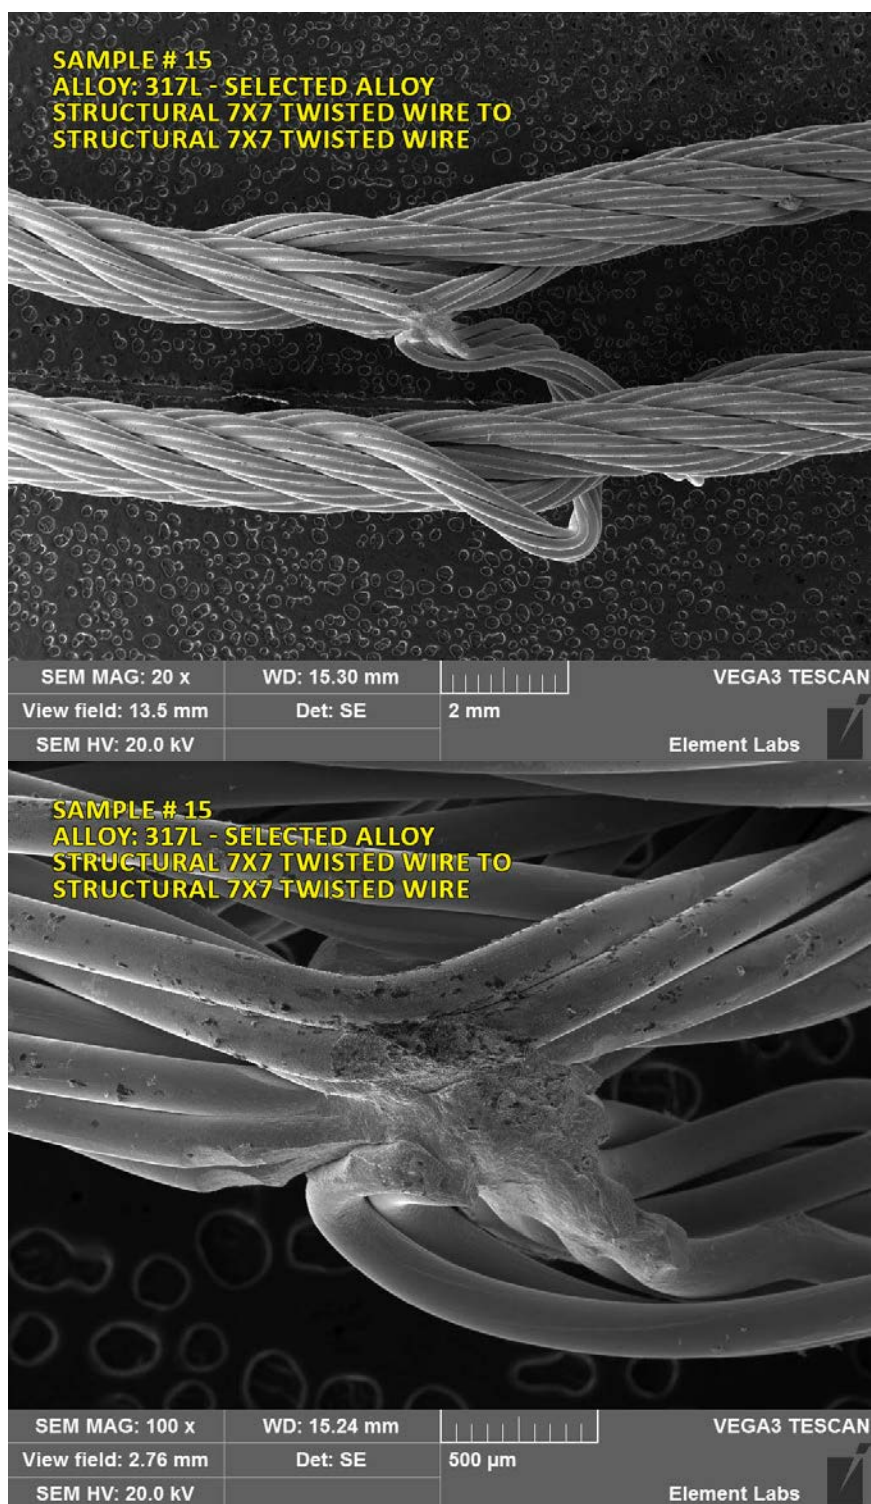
SEM micrograph showing Sample #15 (alloy 317L as-welded sample, no salt fog) after mechanical strength testing. The primary break from this fracture was at the weld as shown. An attached strand is still present between the two structural wires.
